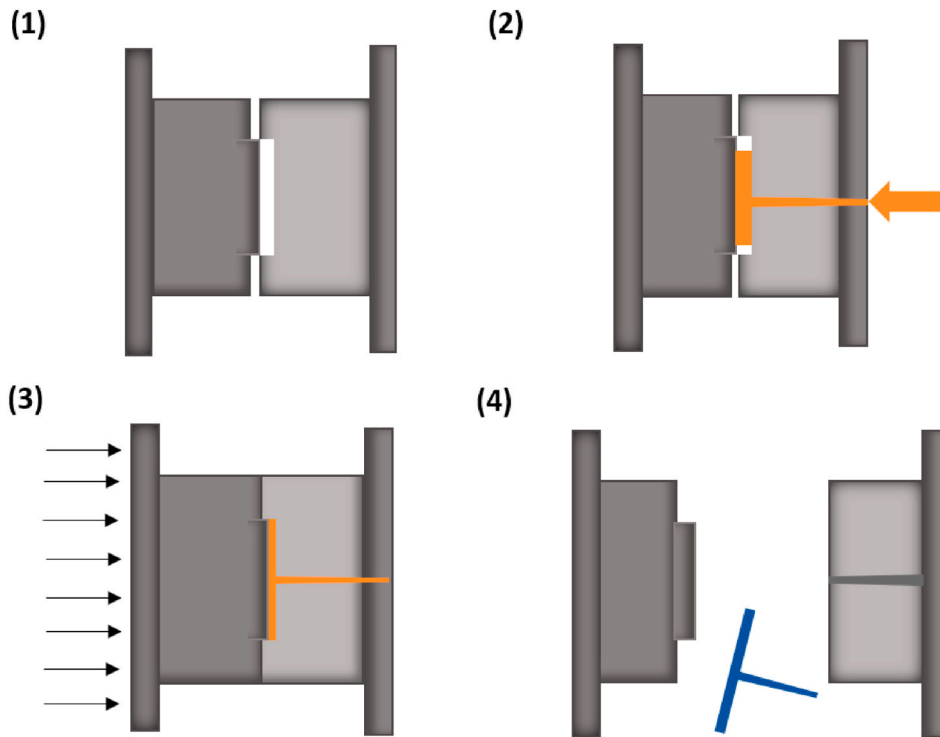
ICM process scheme: (a) Closing the mold; (b) Filling step; (c) Compression step (d) Cooling and ejection step.
